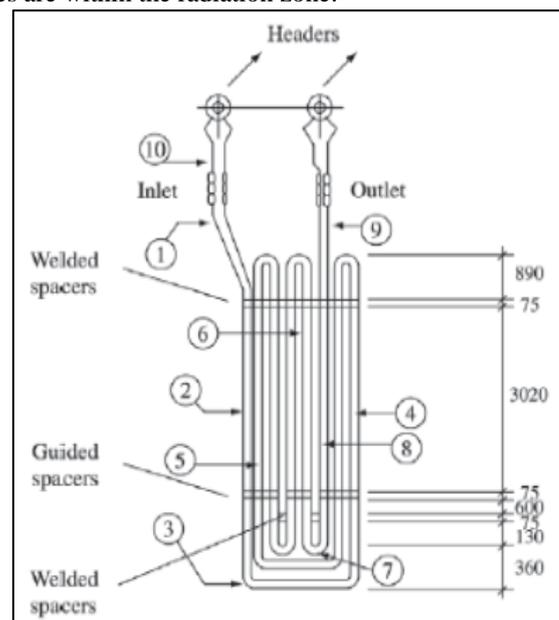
Positions of the samples extracted from a primary super heater assembly
